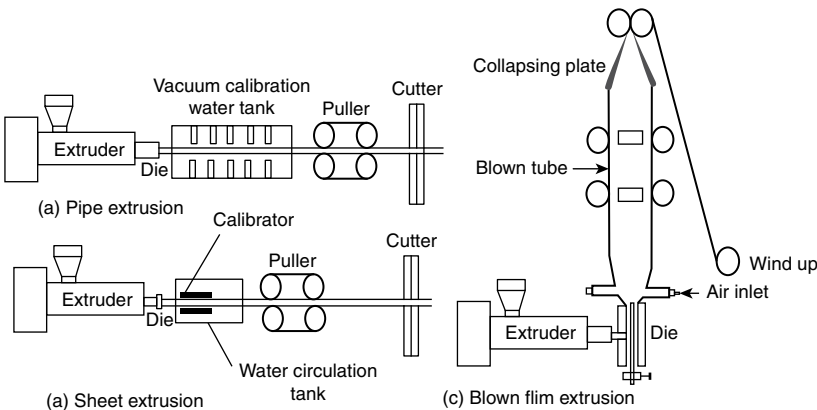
Different types of extrusion (a) pipe extrusion, (b) sheet extrusion and (c) blown film extrusion
